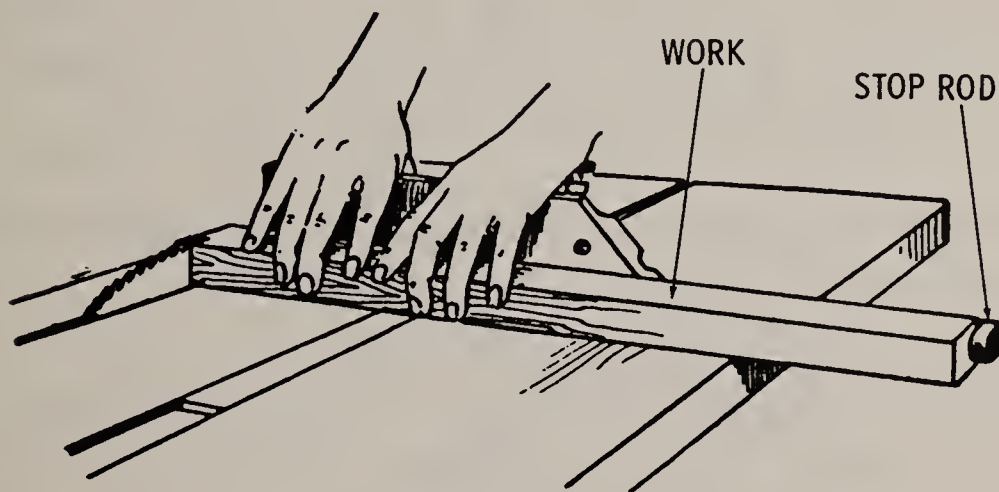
Method of squaring stock on circular saw. Guard is removed for purpose of illustration.
